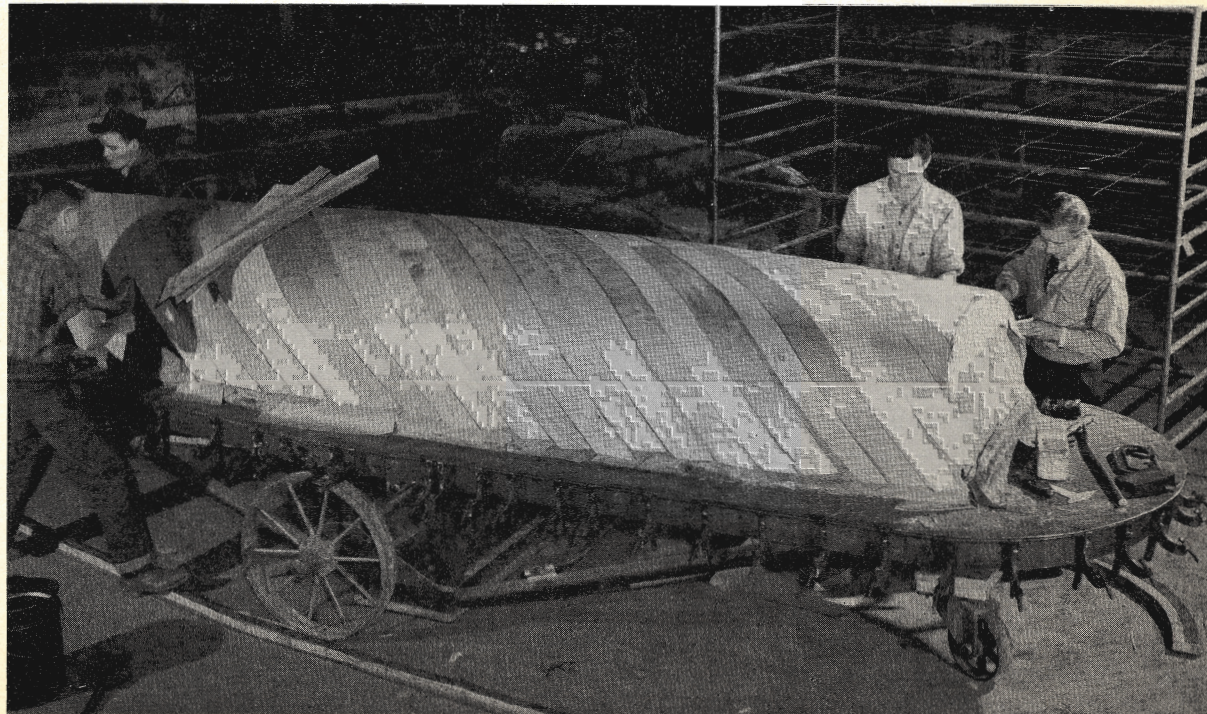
Assembling Plywood Boat with Birch Veneer.
